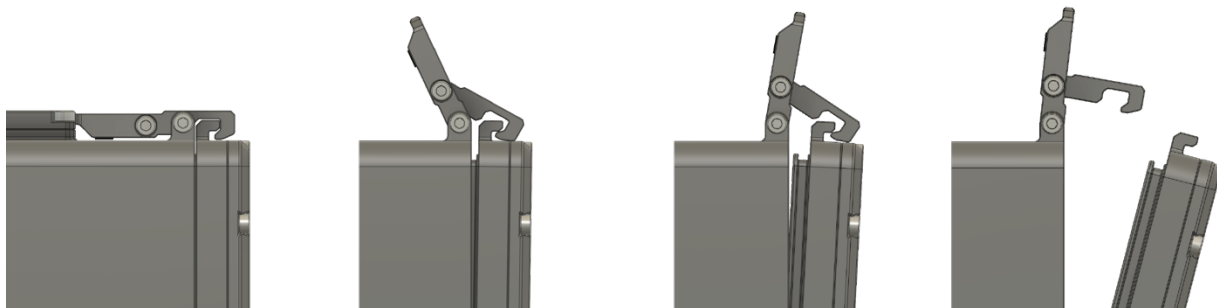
Latching mechanism on the top of the housing. Pictures from left to right demonstrate the opening process.
